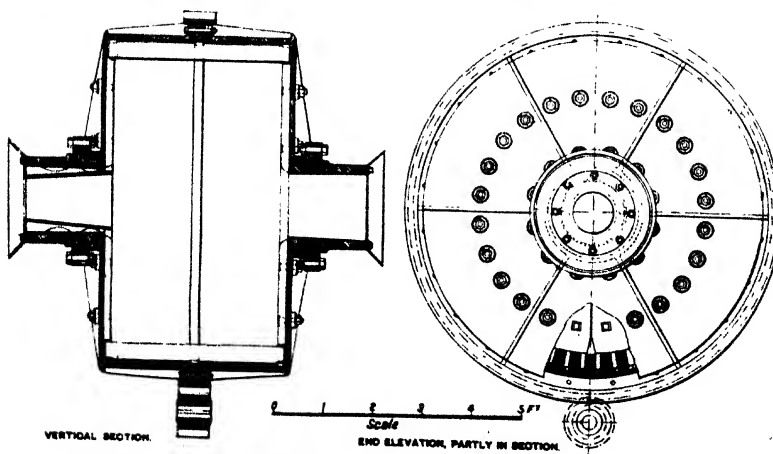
Wet crushing Gröndal Ball mill. Vertical section and end elevation.
